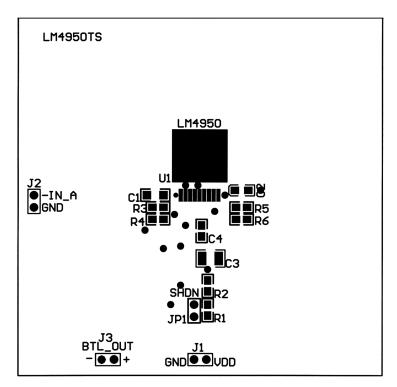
Recommended KTW BTL PCB Layout: Top Silkscreen
